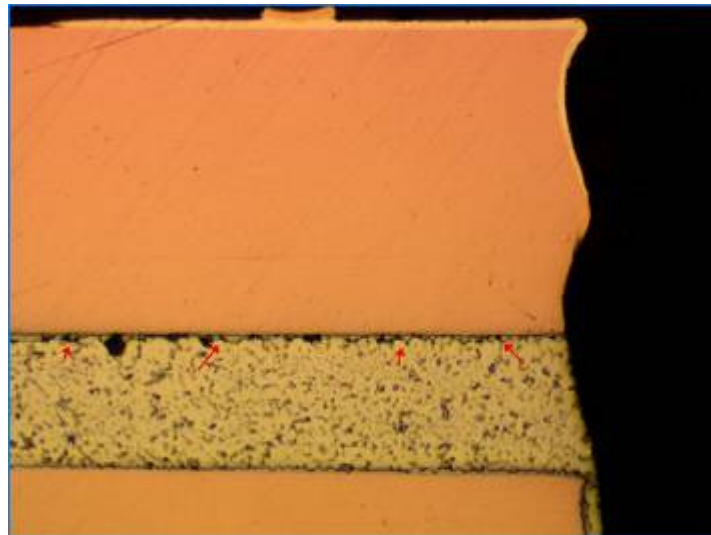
cross section, SN65, U54, left lead solder crack, 200x b
